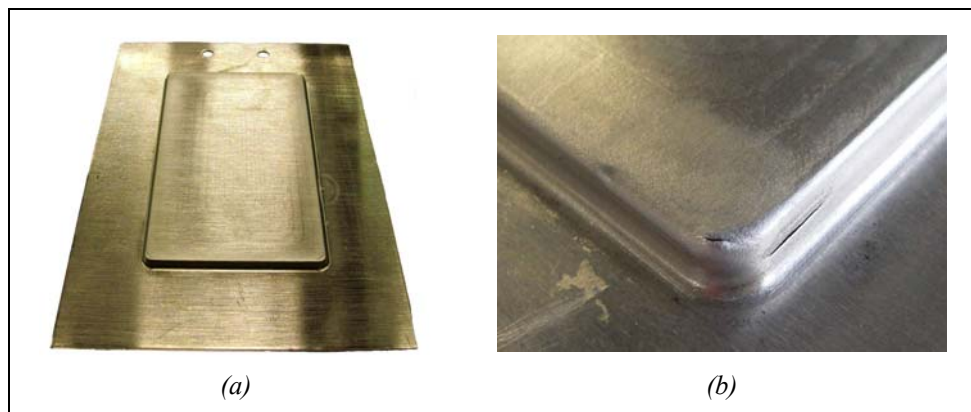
Example of: (a) good deformed sheet metal part; (b) failed deformed sheet metal part.
